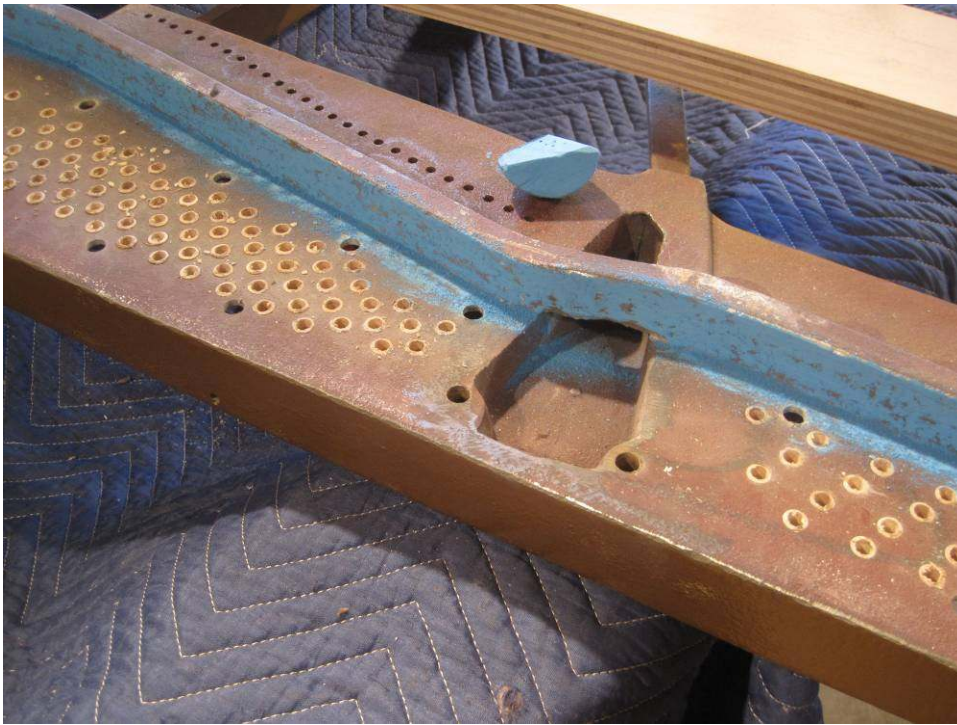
Not having an industrial grade Plasma CNC cutting machine at my disposal, I'll be fitting the pinblock the old fashion way. The first step is to chalk up the flange.
